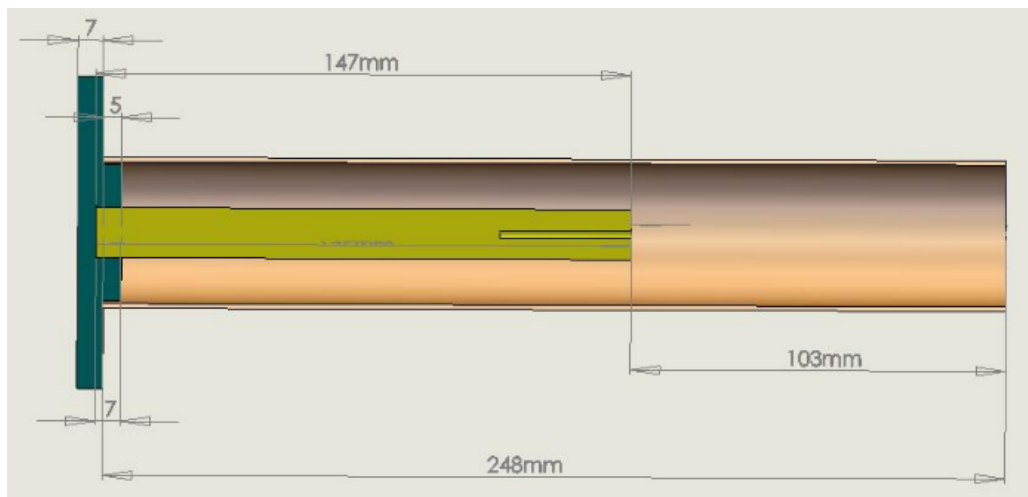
The assembly of the Copper tube with the mounting flange on the top and the fluxgate accommodation rod in the middle.
